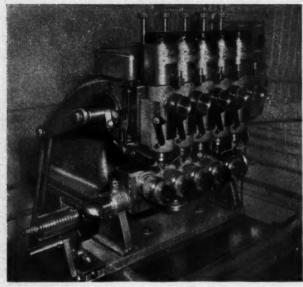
Close-up view of the work-table and spindle head of the machine in Fig. 8, showing details of the individually-motorized spindles and the indexing mechanism for the workpieces
